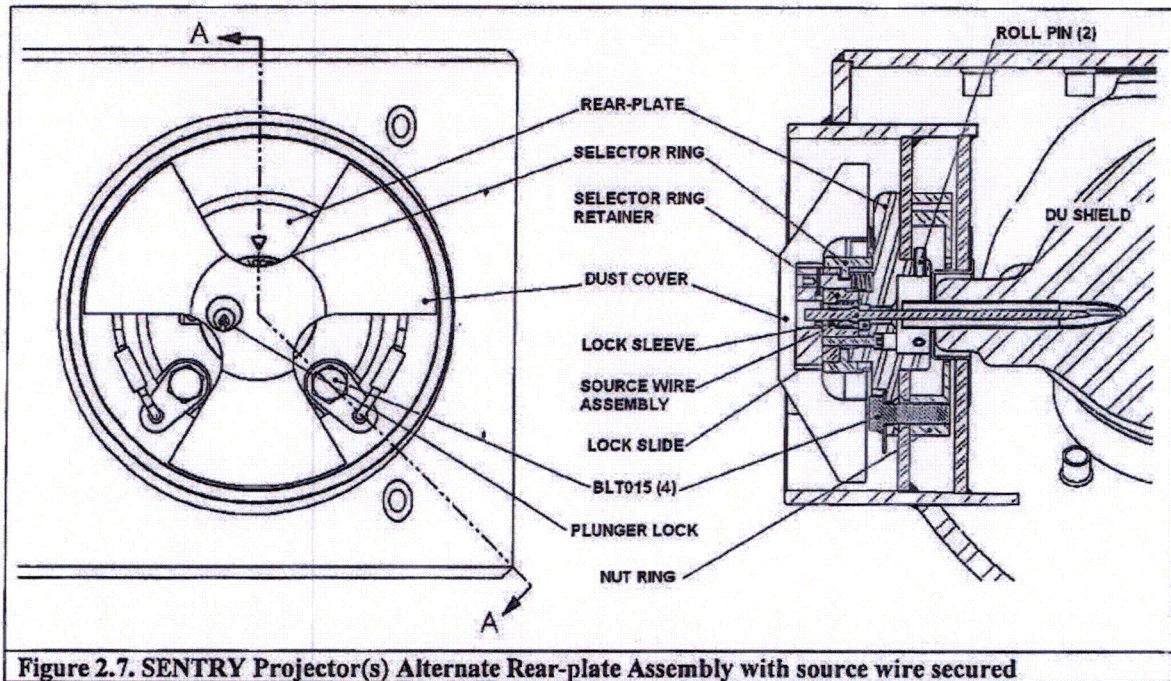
shows an alternate configuration for the rear-plate assembly end on both the projector and source changer versions of the SENTRY transport package. This alternate configuration replaces the rivet nuts with a nut ring. The rivet nuts or, in this case, the nut ring is an integral part of the rear-plate fastening system.
